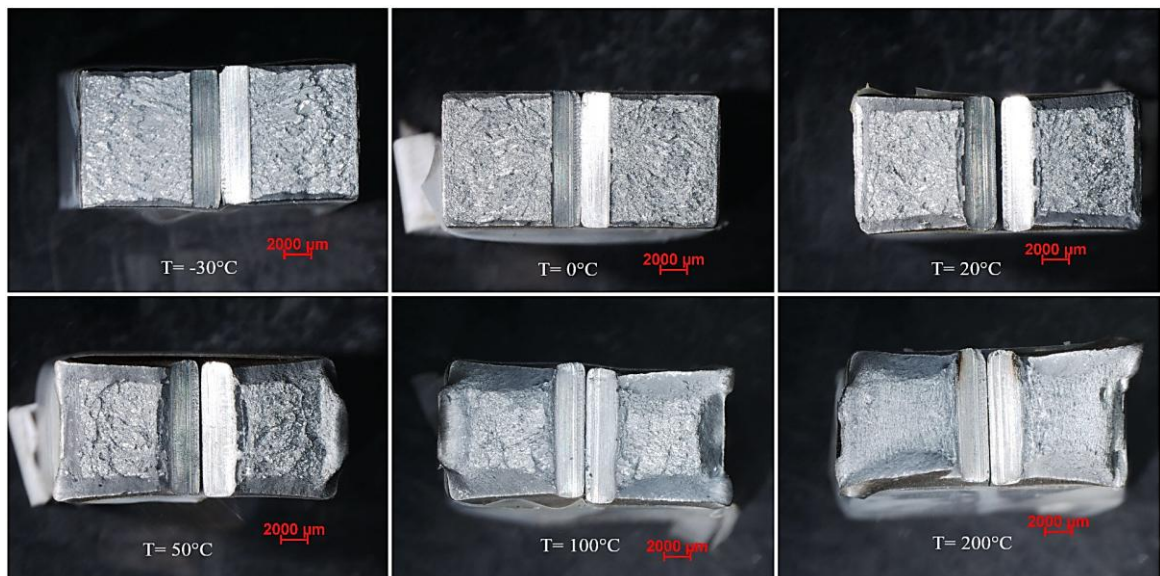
Fracture appearance of the service-exposed weld metal specimens at different temperatures
